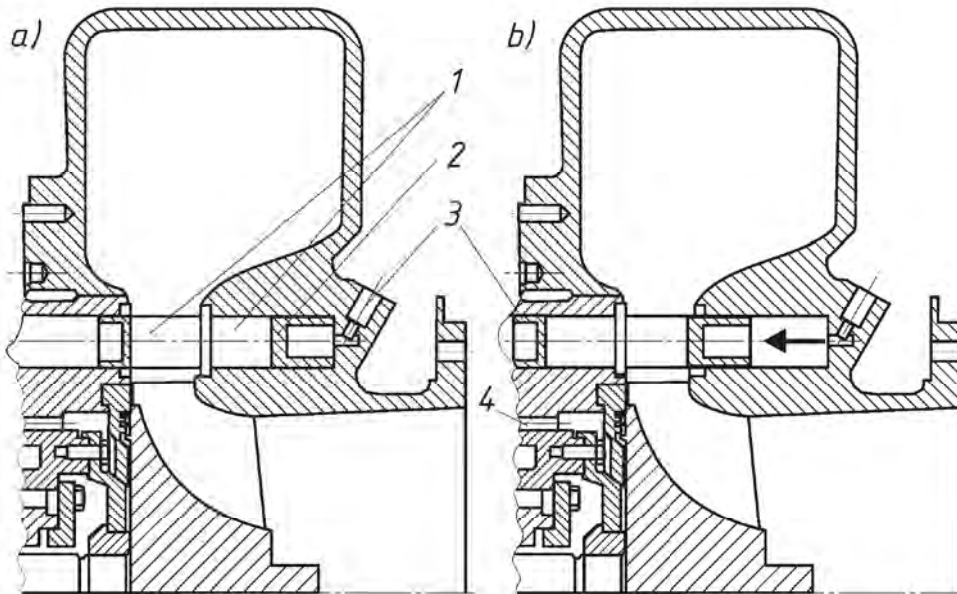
Turbo-charger with a stepwise change in the geometry of the guide vane apparatus: *a* – partial load mode; *b* – mode close to full power. 1 – sets of blades with different flow sections; 2 – pneumatic piston; 3 – control air supply channel; 4 – sealing air supply channel
